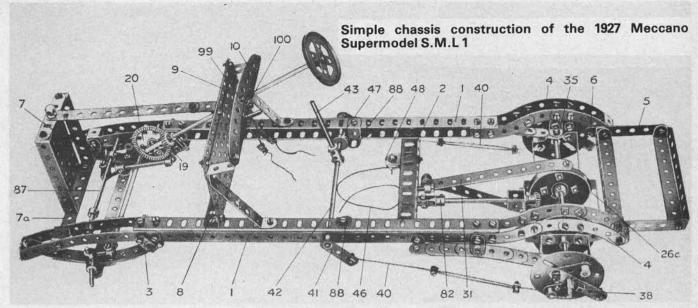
Bare outline of the Meccano chassis for Supermodel No. 1 "The Meccano Motor Chassis," circa 1927. Note internal expanding brakes on rear axle.
